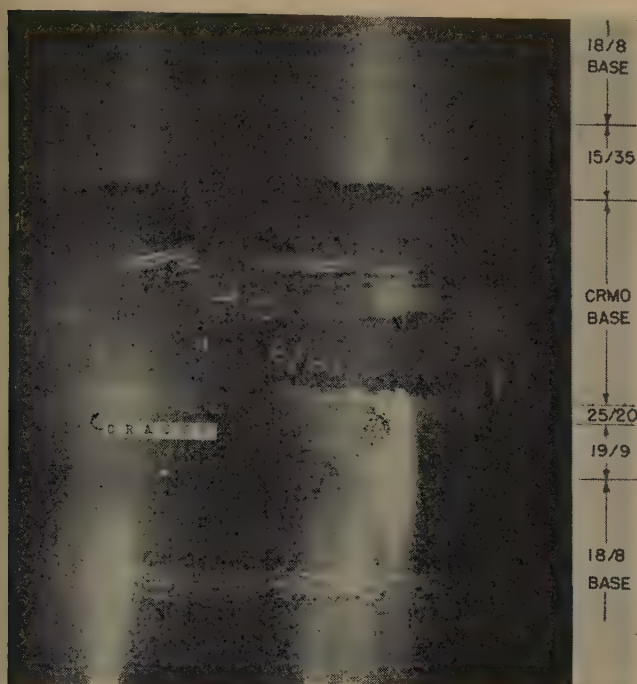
ZYGLO EXAMINATION OF 19/9 WELD
